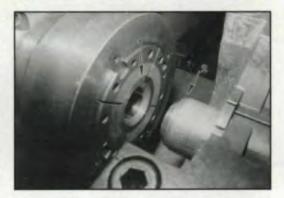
Inertia welding machine setup for welding aluminum bar to alloy steel ring.
